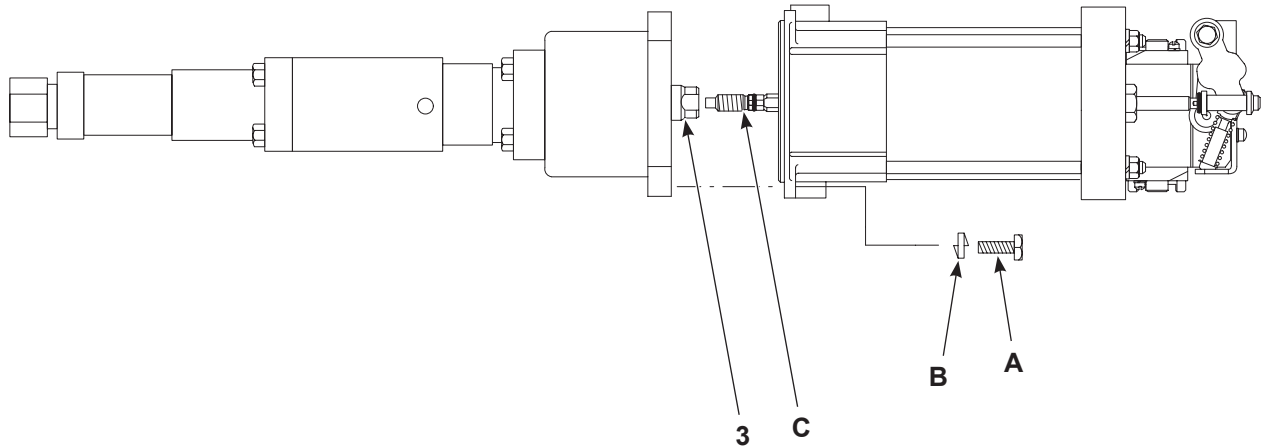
Separating the Air Motor and Hydraulic Section (Aluminum Hydraulic Section Shown)
